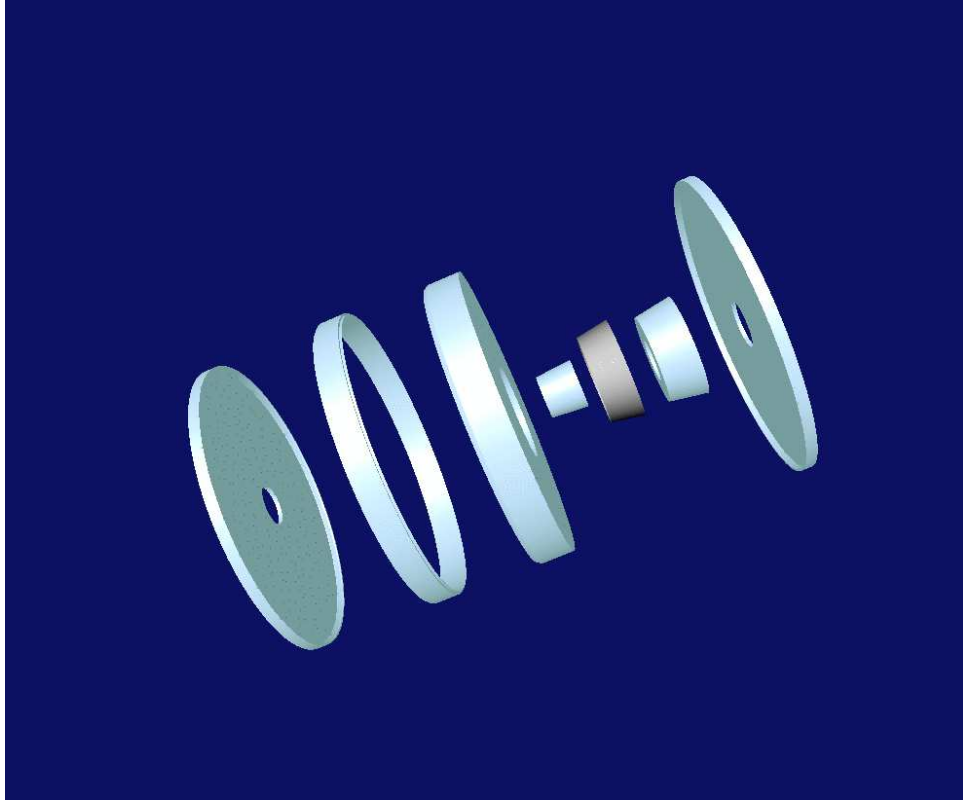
Exploded view of the EMEC LAr volume. From left to right: The front support mother, the outer support mother, the outer wheel, the inner aluminum cone (which is wrapped in a thin layer of LAr), the inner traversal bars, the inner wheel, and the back support mother.
